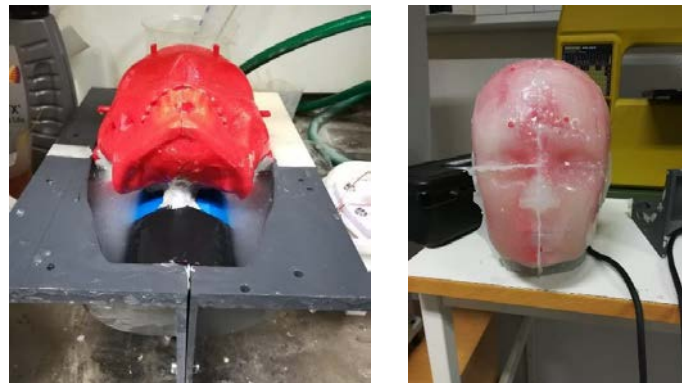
ABS 3D printed Skin Mould used for the casting of the external part of IHHS2
